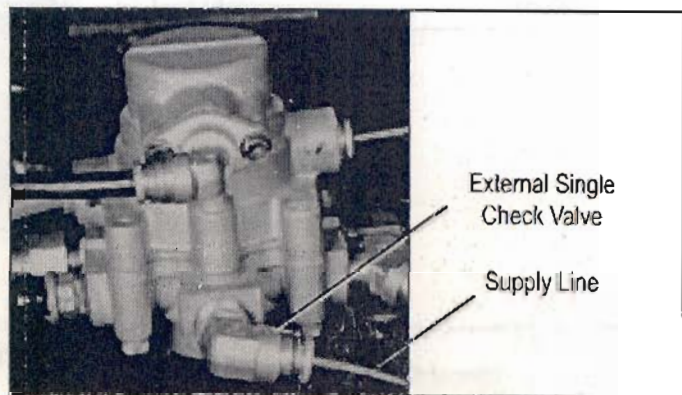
SR-7™ VALVE AND EXTERNAL SINGLE CHECK VALVE
